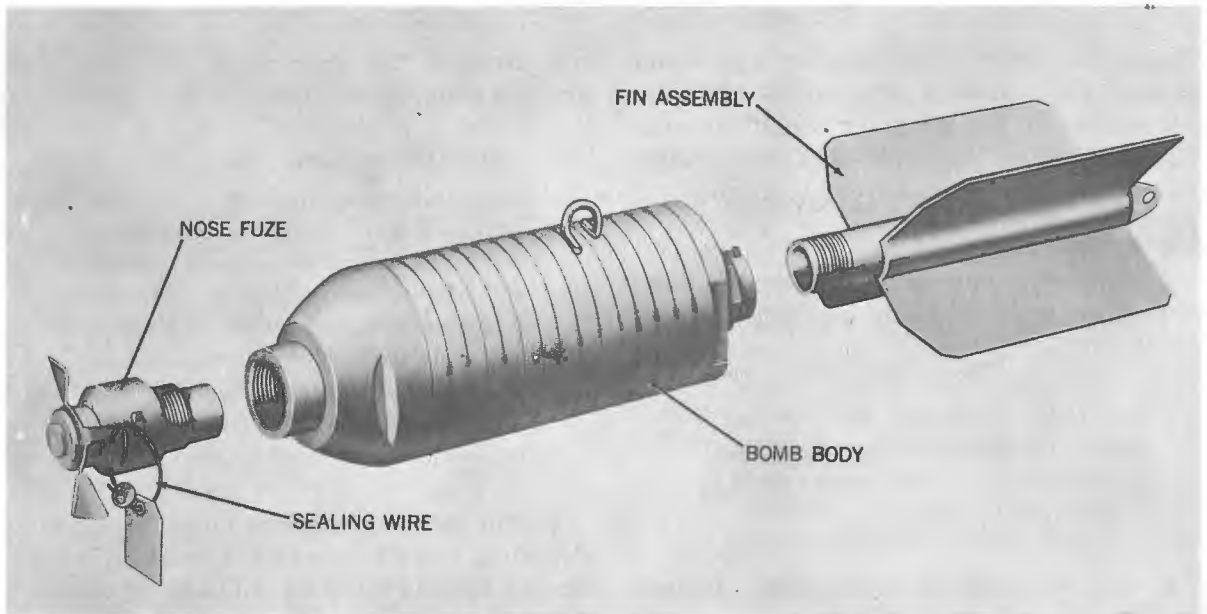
20-lb Frag Bomb AN-M41A1, Exploded View.
